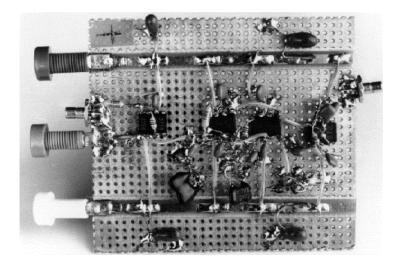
"A Deadbug" Prototype Using 0.1" Pre-Drilled Single-Sided, Copper-Clad Printed Board Material
